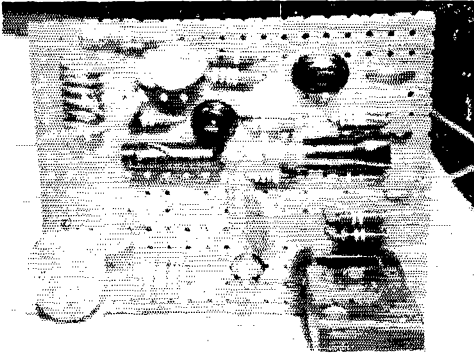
Parts for the 2-meter transmitter-receiver are mounted on a piece of perforated phenolic board.
